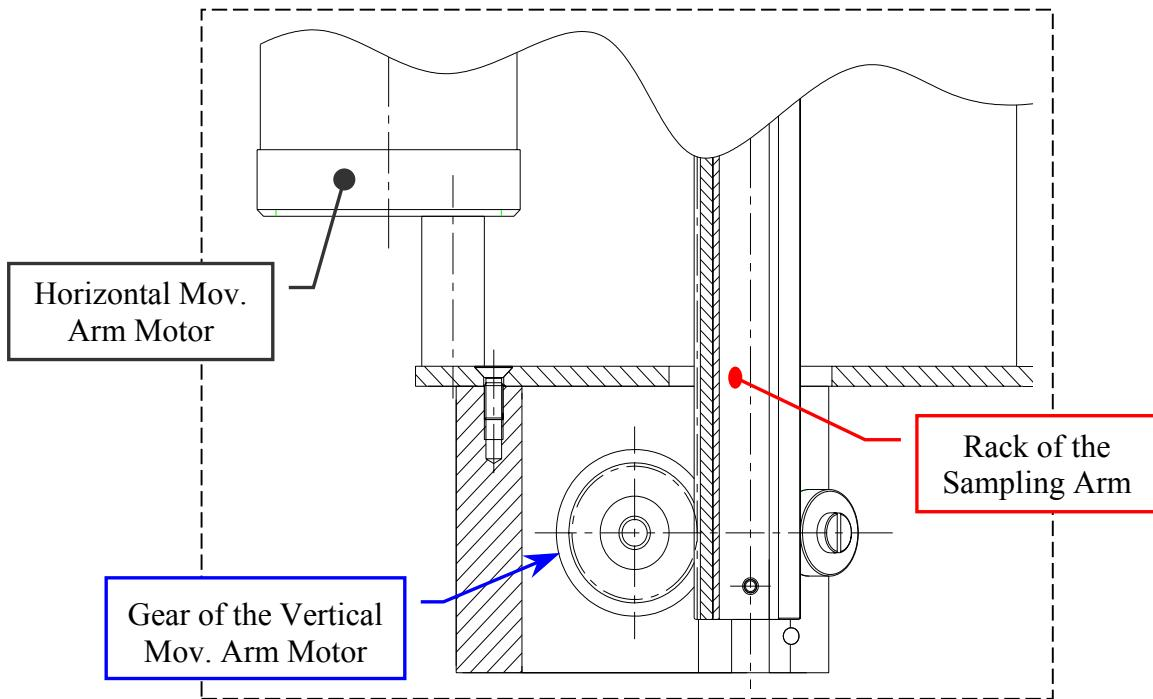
Vertical Mov. Arm Motor gear lean on the rack (detail drawing)
